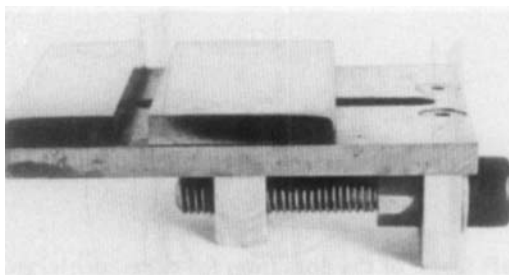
Fixture for holding bone specimens when grinding to different dimensions. The cut bone strip is fixed between the jaws and can be elevated by putting metalrods of different dimensions under the specimen, thus enable grinding off various amounts of bone until a rectangular cross section is obtained.
